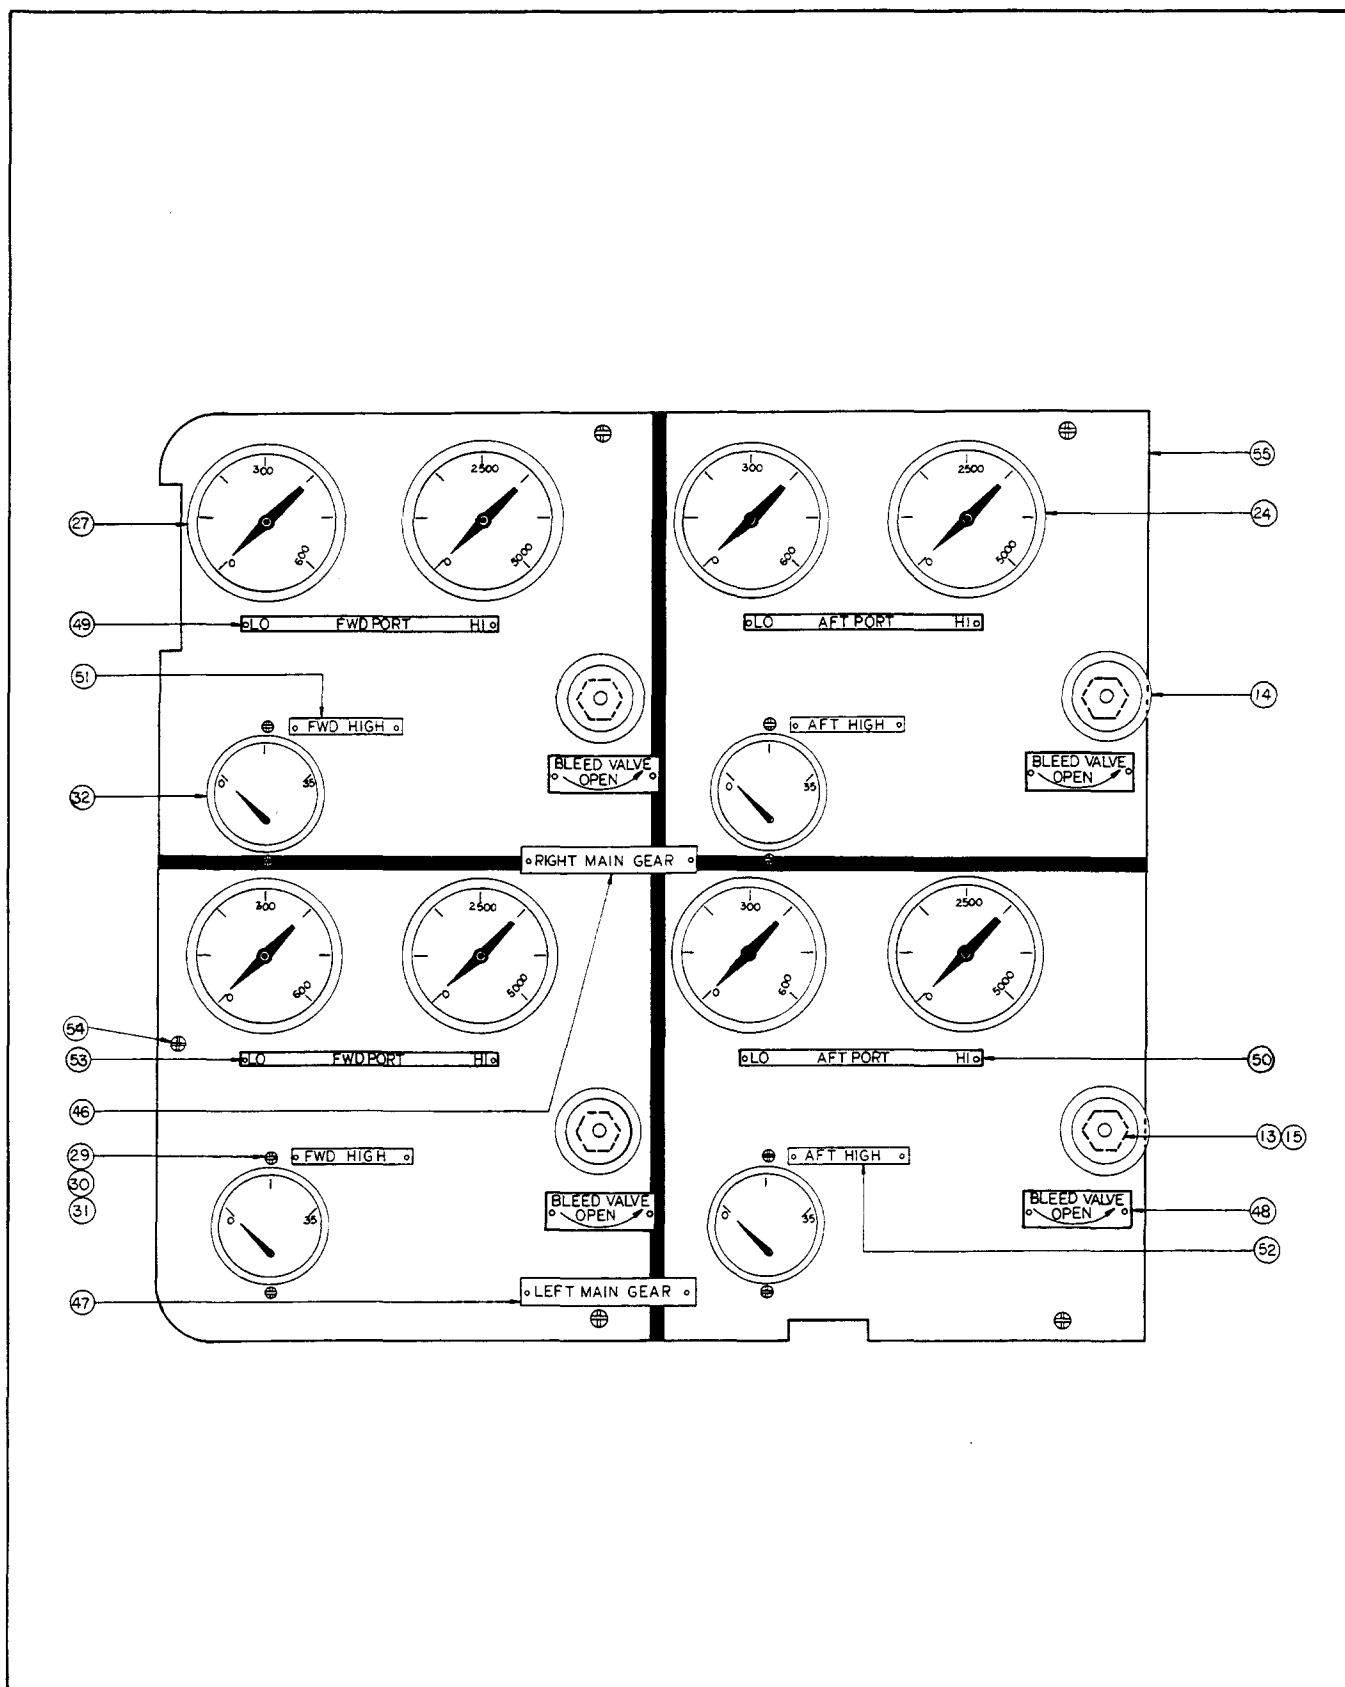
Panel Assembly (Sheet 1 of 3)
